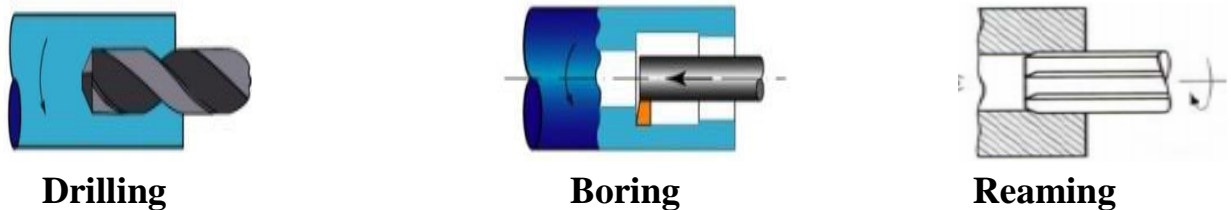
Types of Drilling operations performed on Lathe Machine
